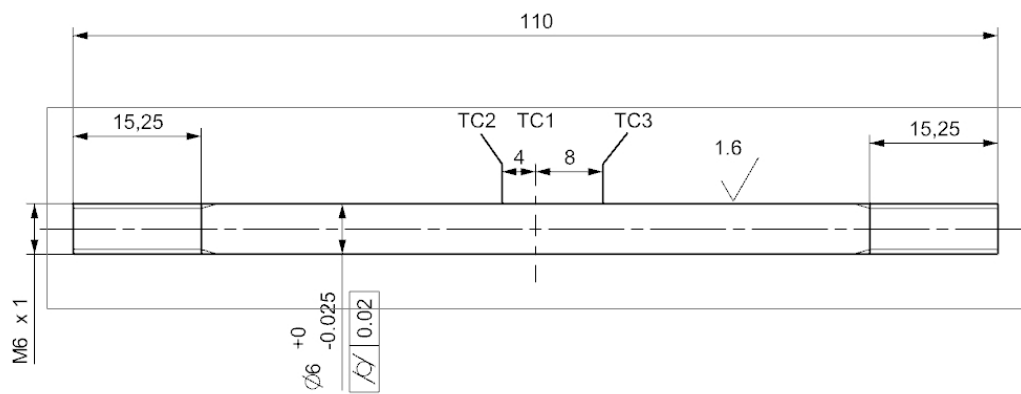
Tensile Gleeble specimens geometry. TC1, TC2 and TC3 represent the location of the thermocouples fixed on the specimens. Dimensions are in mm
